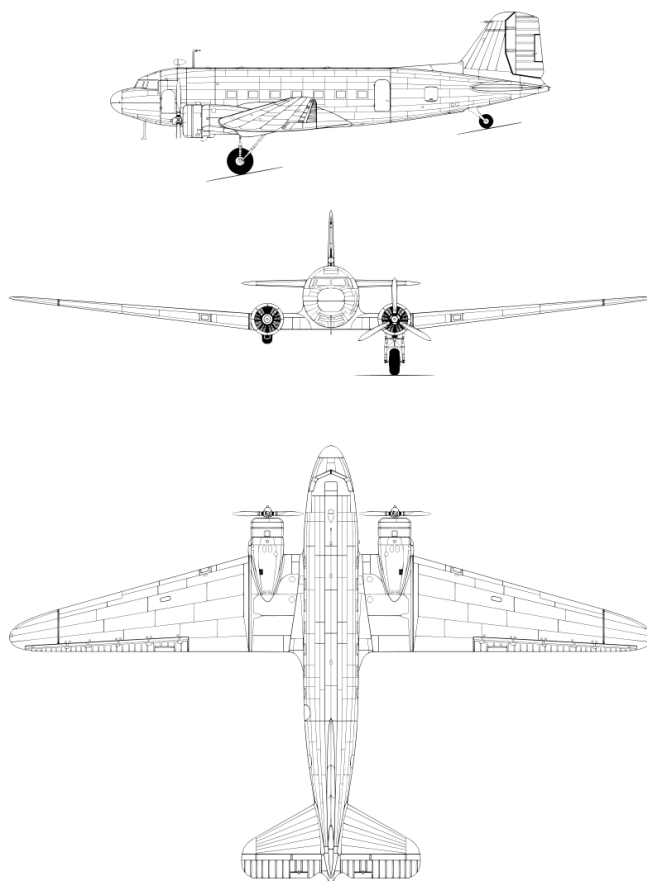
Three-view drawing of the Douglas DC-3 [38].
